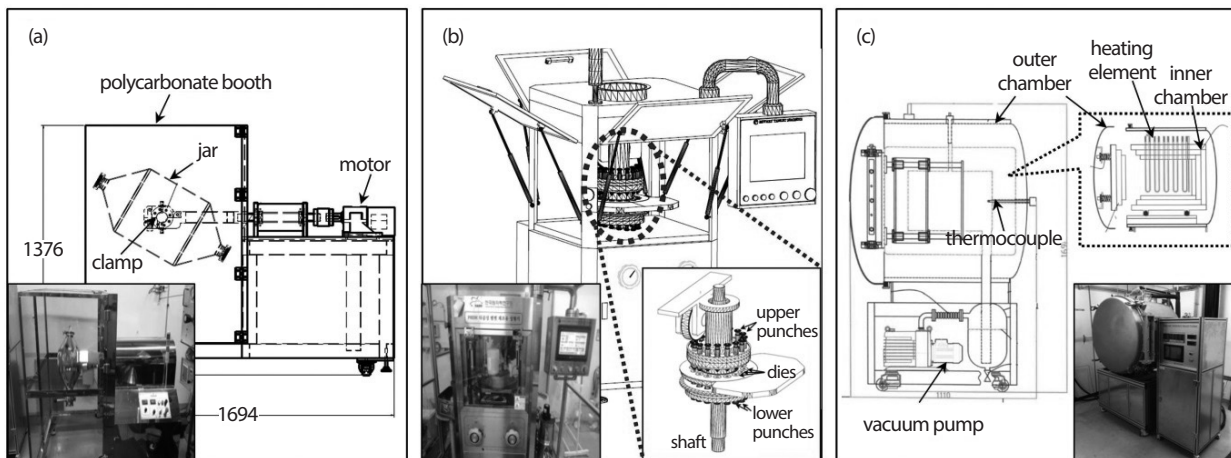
Schematic drawings and photographs of (a) Tumbling mixer, (b) Rotary press, and (c) Double chamber furnace.
